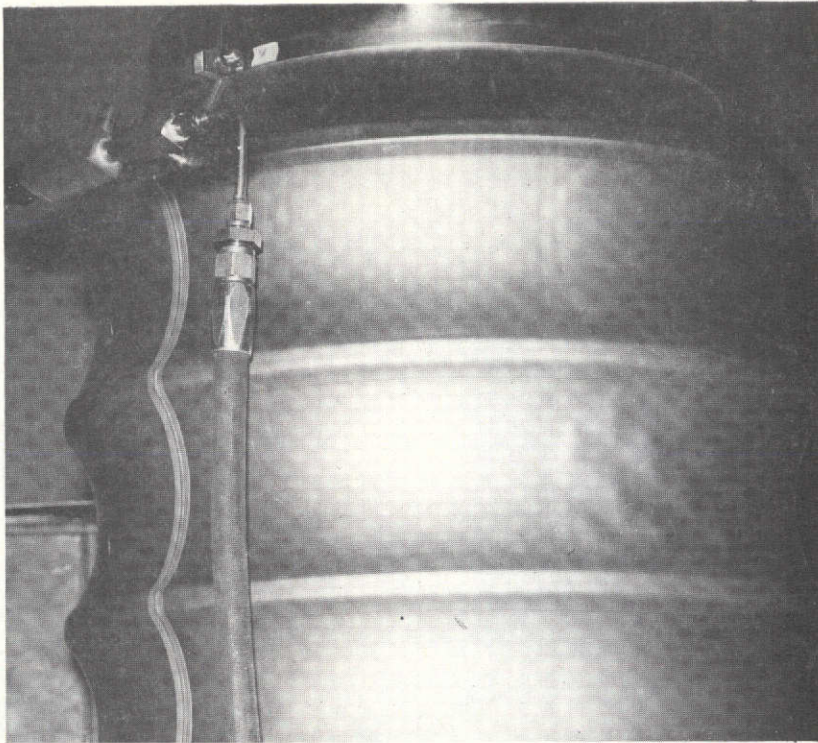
Assembly #1, 635 mm (25 in.) Hg Vacuum Pressure
